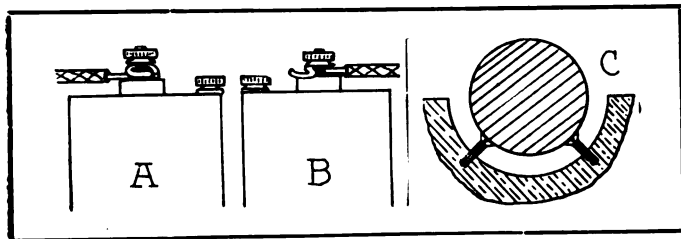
A, Correct Turn of Cable on Blading Post; B, Incorrect Turn of Terminal Wire; C, Alignment of Shaft When Babbitting Bearings.
